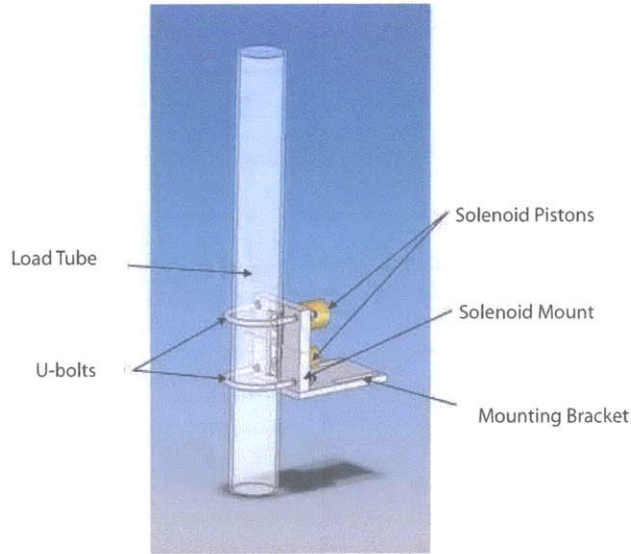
Loading mechanism showing the loading tube, u-bolts, solenoids, and mounting bracket.
